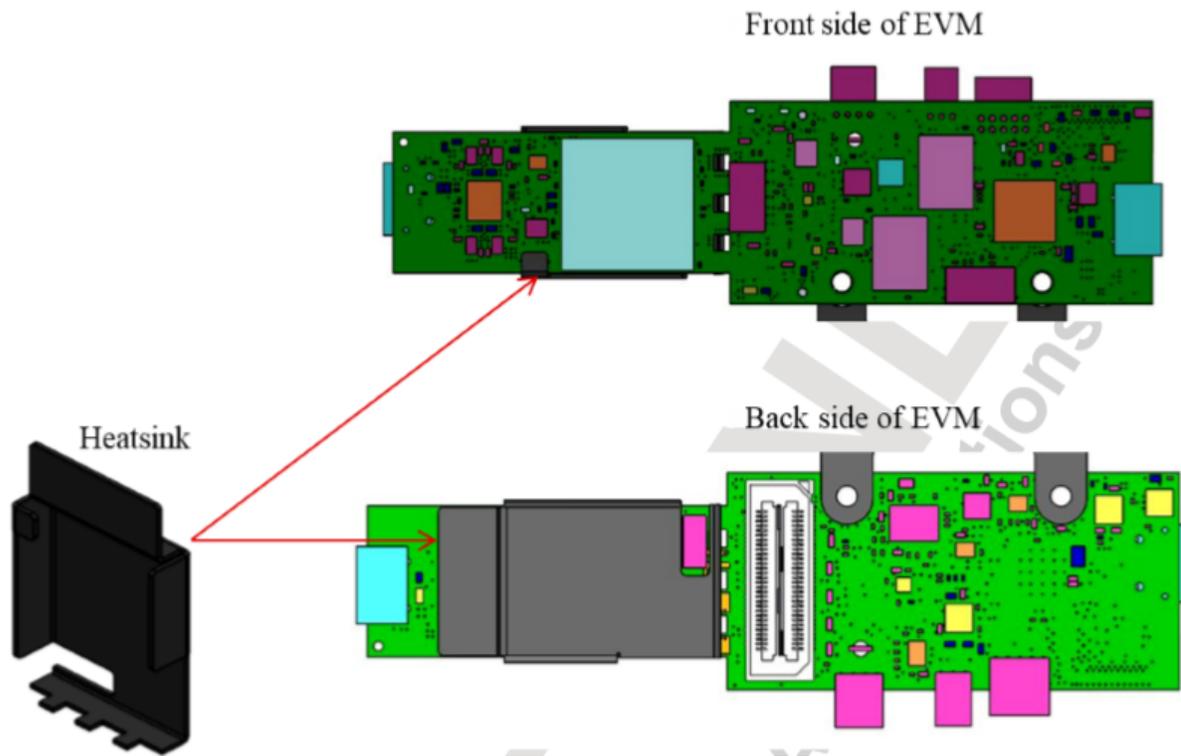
Sheet Metal Heat-Sink Used in the Form-Factor EVM
